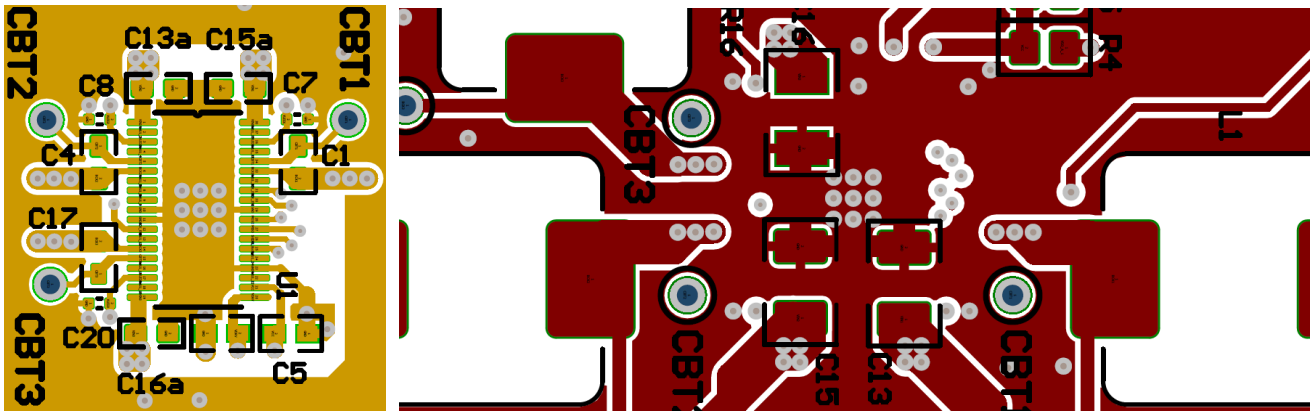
NCV78935 Top Side Exposed Pad Reference PCB Layout (Top and Bottom View)
